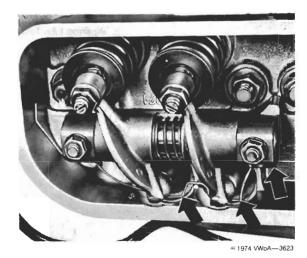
Pushrod tube retaining wire installation. The wire must bear against the ends of the pushrod tubes (lower arrows) and engage the slots in the rocker arm shaft supports (upper arrow).
